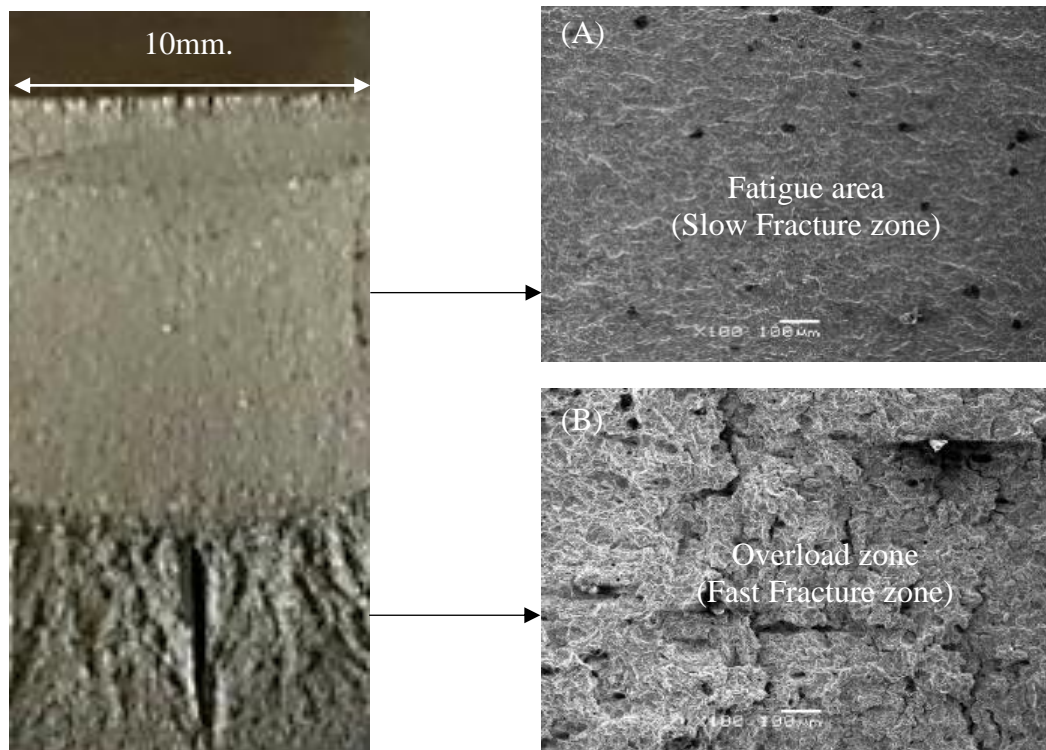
The morphologies of the fatigue crack growth area (A) and the brittle fracture area (B) are shown in a macro view of the fractured surface.
